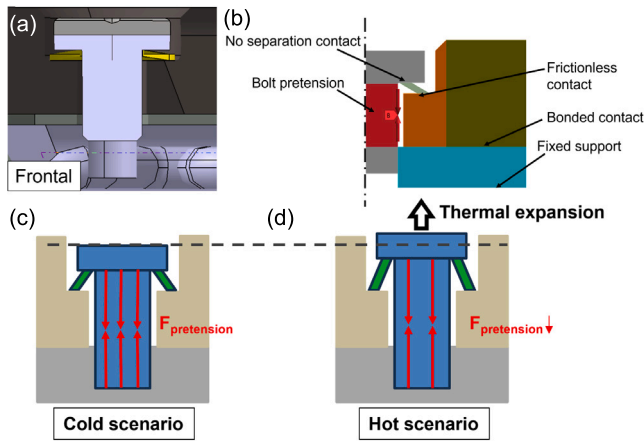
(a) CAD view of the bolting between the front facing graphite tile and the stainless steel. Washers in yellow, the steel base of the bolt assembly in the lateral assembly is coloured in green.
